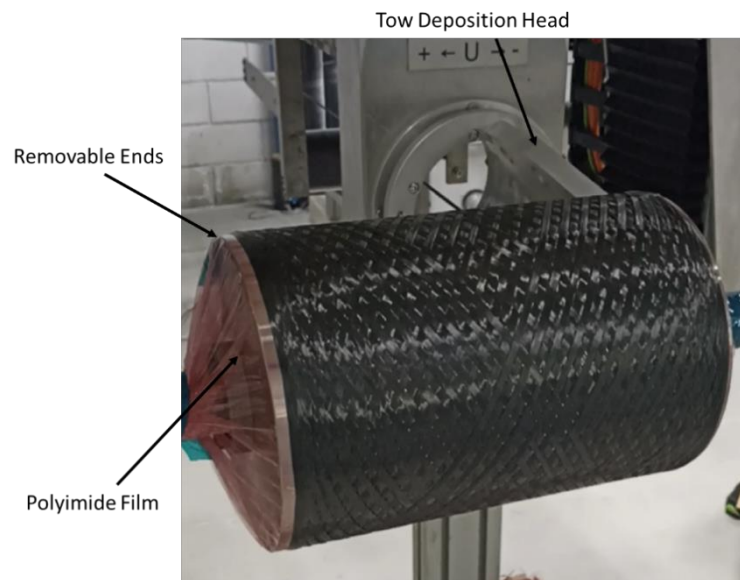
Instant from the filament winding process and the configuration of the machine/mandrel.
